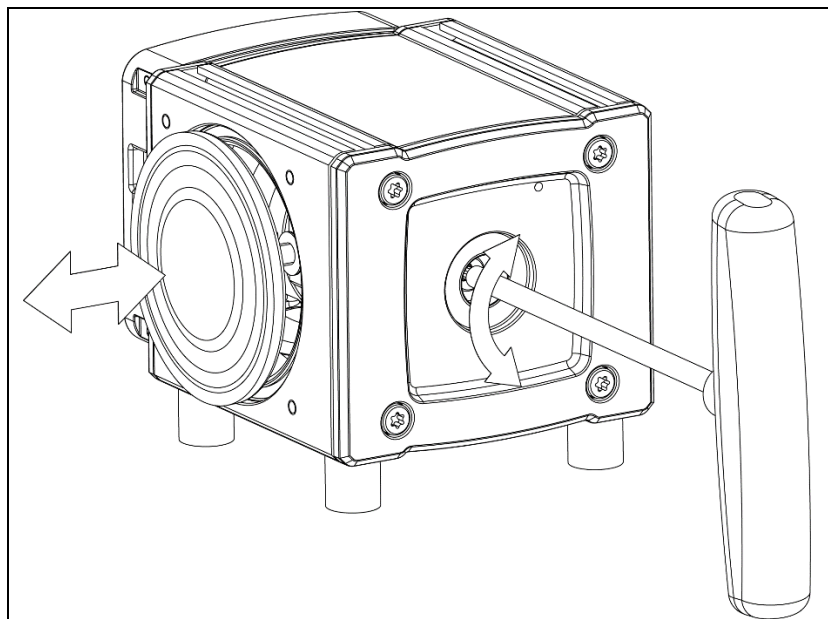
Turn the shaft and bring the diaphragm to the upper reversal point
